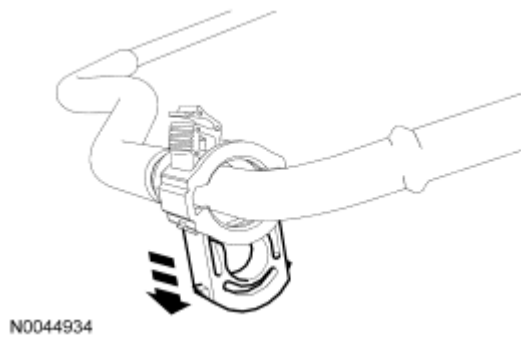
Pushing Locking Mechanism Outward And Releasing Fuel Supply Tube
